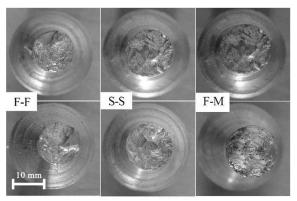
The cross section of broken welded part in 2500 rpm. مكل 7 سطح مقطع شكست نمونههاى جوش كارى شده در سرعت دورانى 2500 دور بر دقيقه
